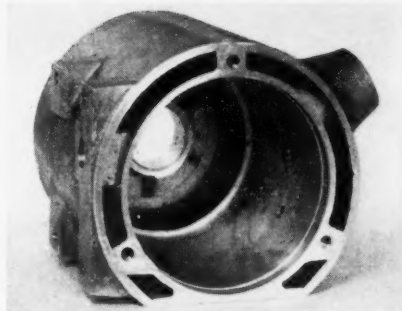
Completely machined aluminum motor housing for swing abrasive cut-off machine shown in Fig. 2
